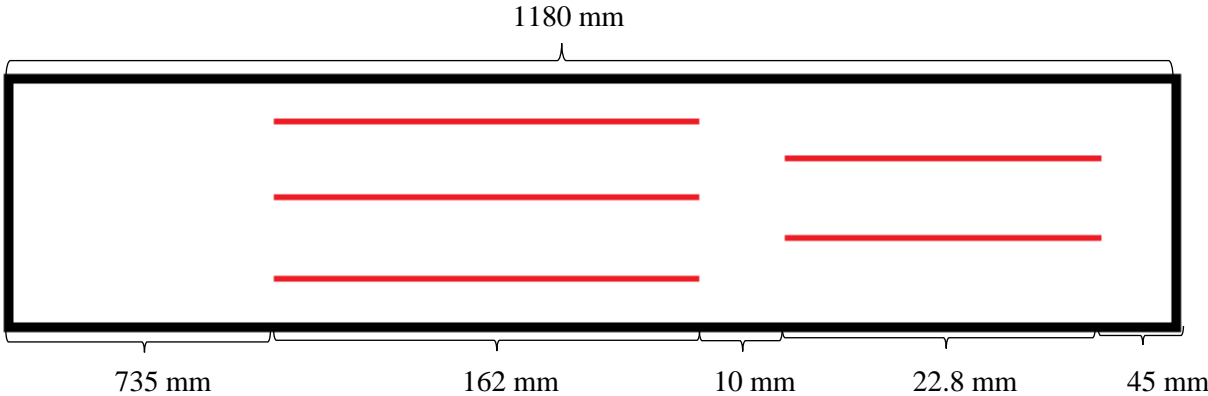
Cutting pattern and cut lengths of specimen T1.
